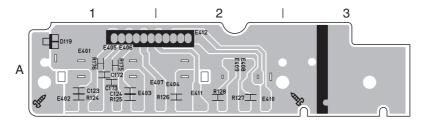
EU03C Front Jack PC Board (Bottom side)
